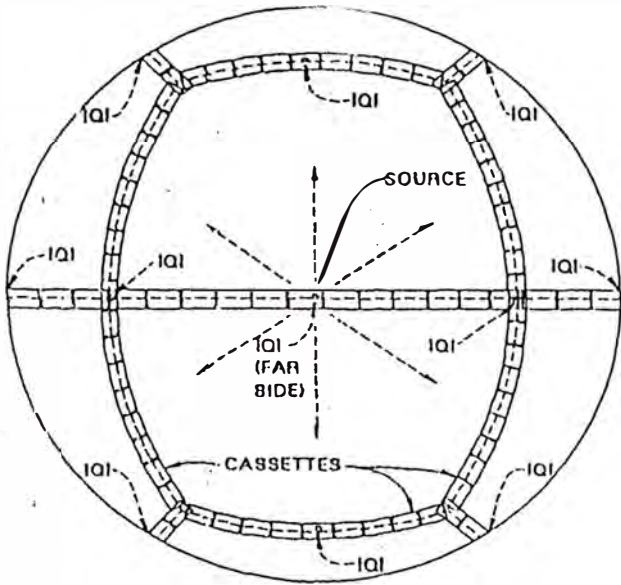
COMPLETE CIRCUMFERENTIAL WELDS SPHERICAL COMPONENT [T-277.2(b)(4)(a) & T-277.2(b)(6)]
